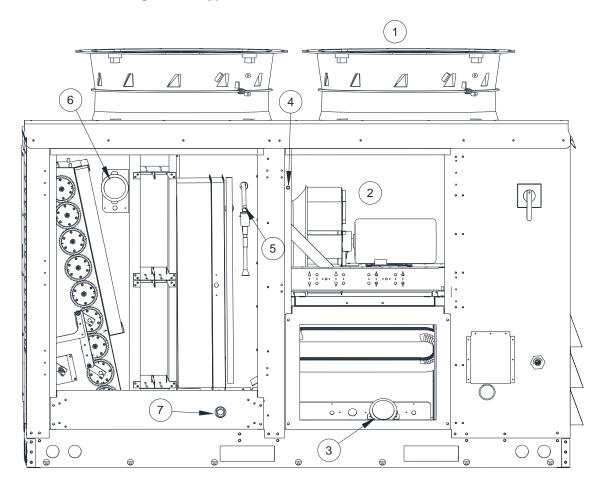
Typical Blower and Air Intake Access Doors/Panel
